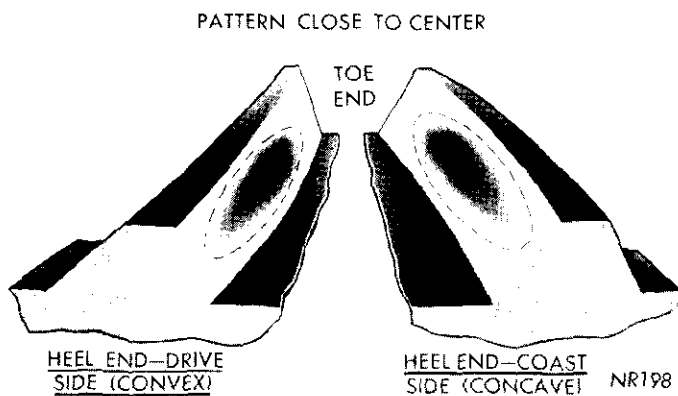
Desired Tooth Contact Pattern Under Light Load
